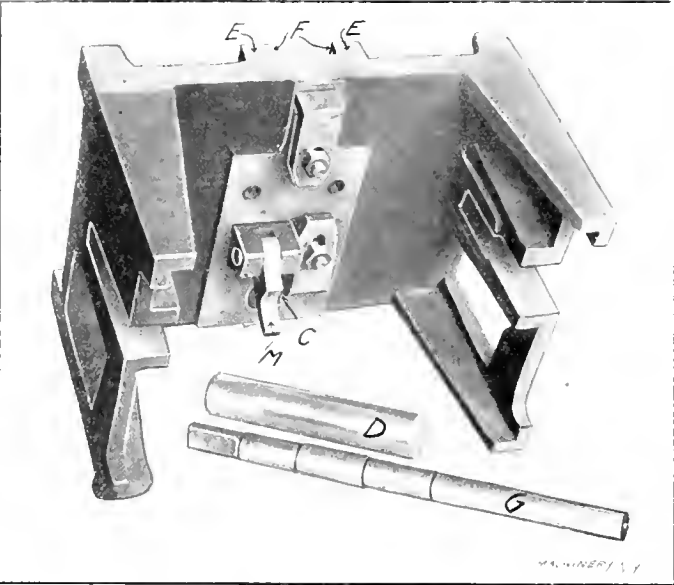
Jig for Drilling Screw-holes in Casting shown in Fig. 10, and for Drilling Corresponding Holes in Frame, also employed as a Worm-wheel Gage.
